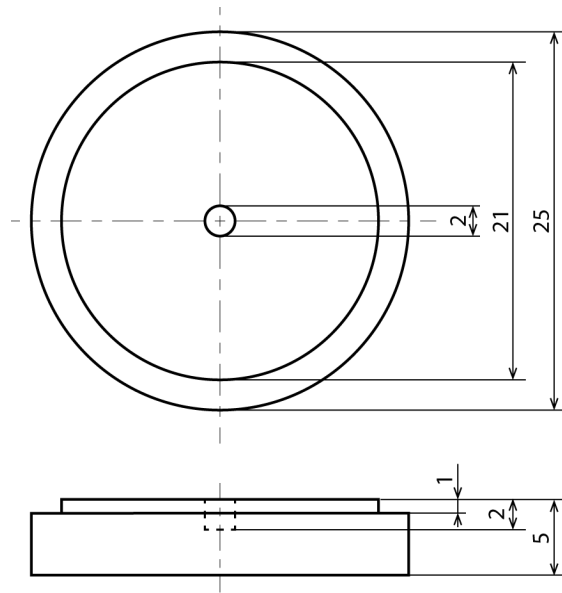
Dimension (in mm) of the base of the device, top view (above) and side view (below)
